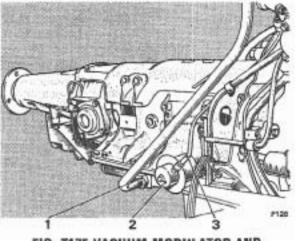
VACUUM MODULATOR AND VACUUM PIPE
